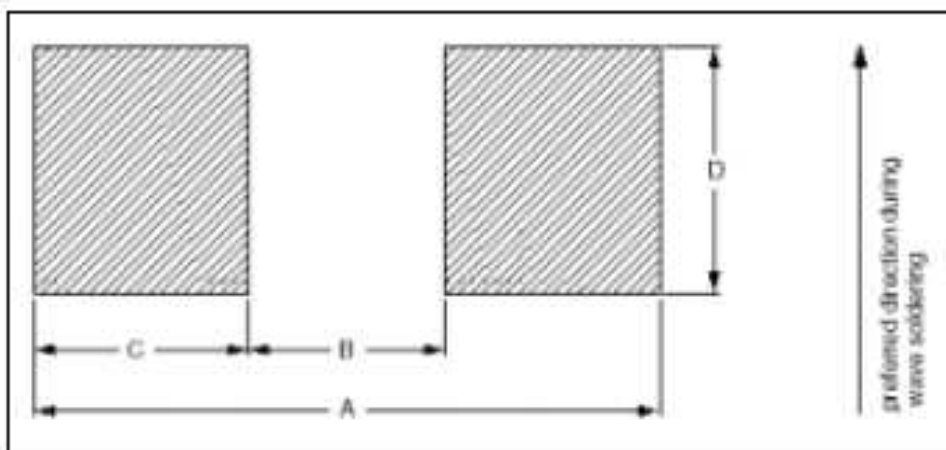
RECOMMENDED FOOTPRINT DIMENSIONS
